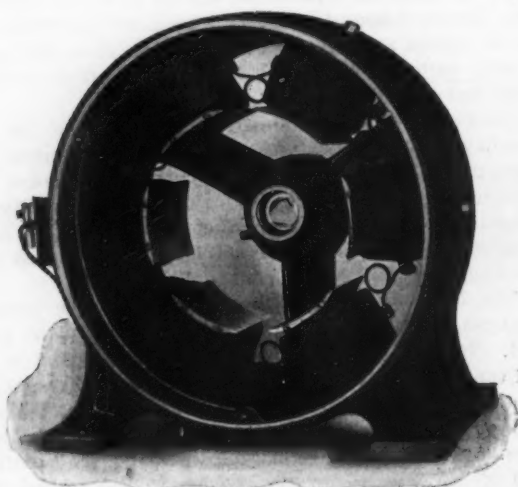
A Type D Six-Pole Sprague Motor with Armature Removed.
